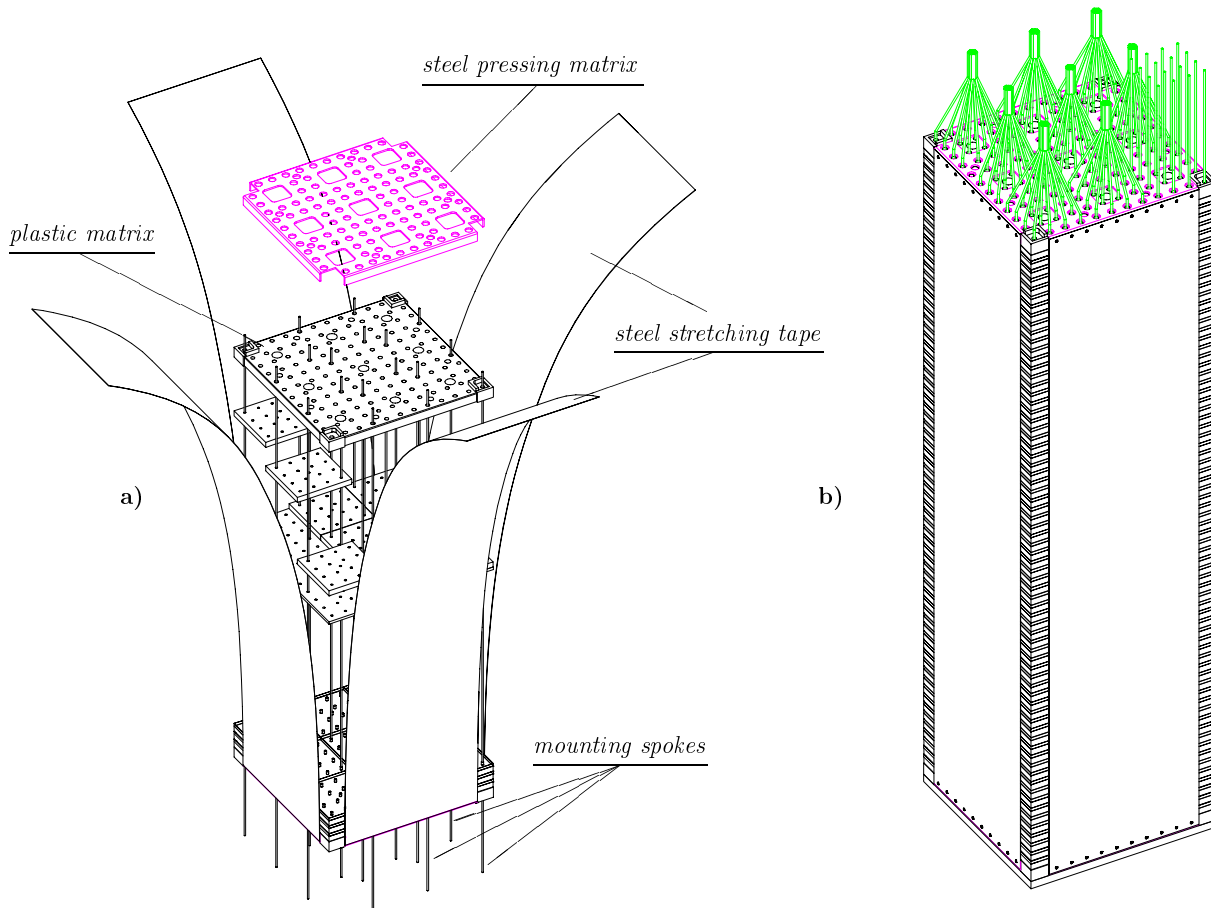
Assembly of the inner section module: shown are a) the Pb/Sc stack during assembly, and b) the assembled stack with welded tape and inserted fibers. For more details see the text.
